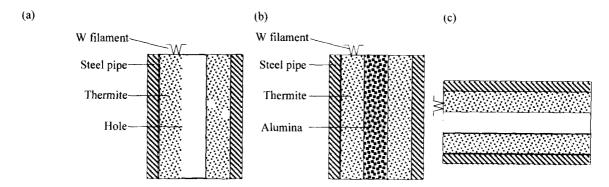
Schematic of experiment, (a) making a hole in thermite; (b) the hole filled with alumina; (c) putting the pipe horizontal.
